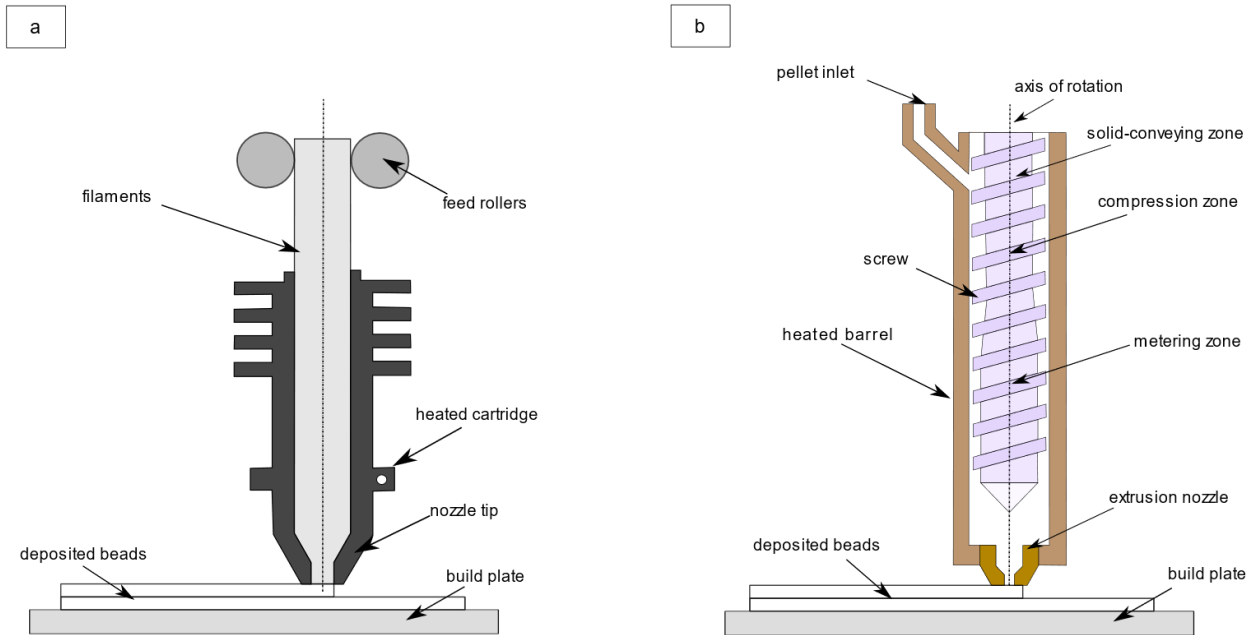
a.) Perspective view of FFF process; b.) front view of the complete extrusion system in PAM.
